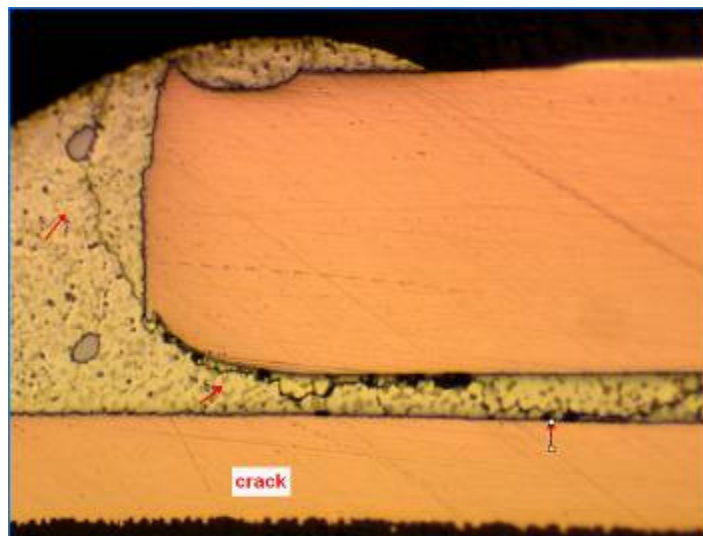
cross section, SN61, U28, left lead solder crack, 200x a
